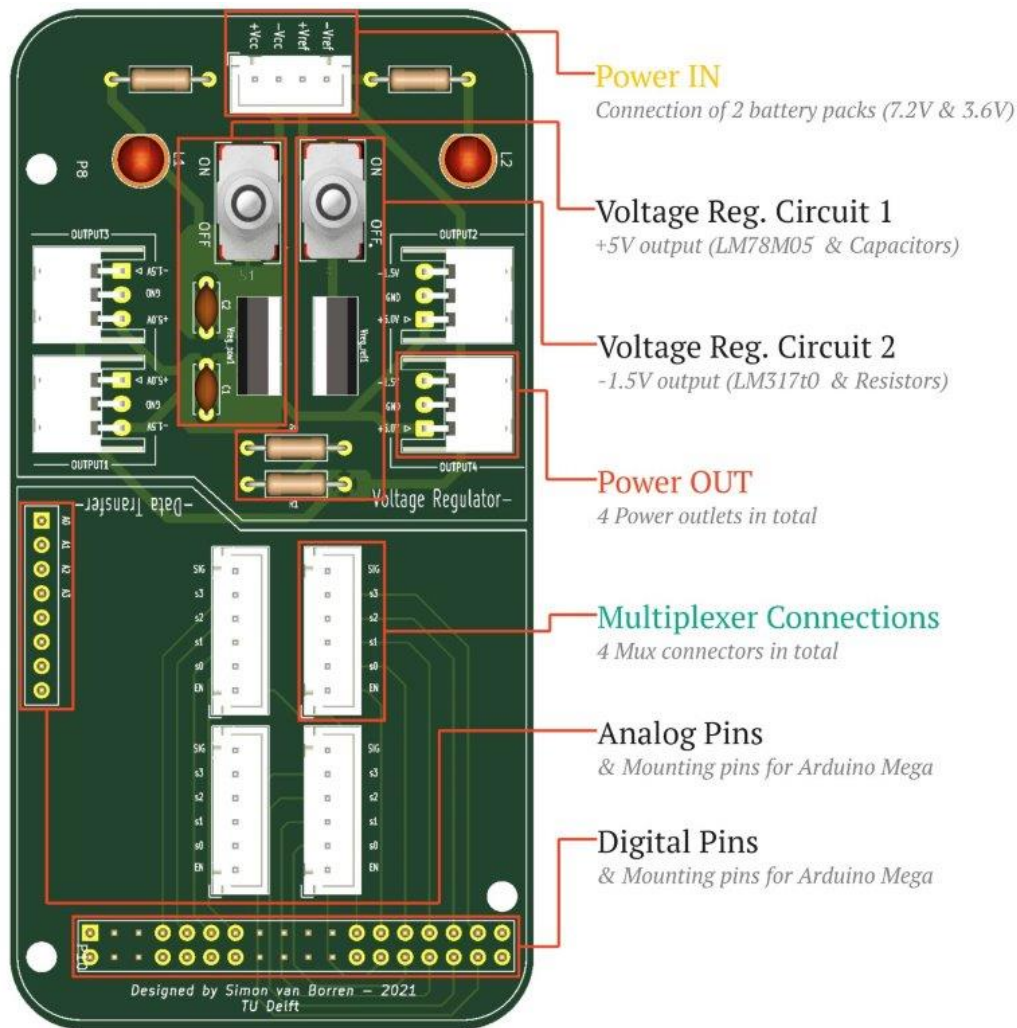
A model of the final design for the voltage regulator & data-transfer module printed circuit board (PCB). The module is separated into two parts where the upper part serves as a voltage regulator and the lower part as the data-transfer hub. The module is mounted directly on top of the Arduino and is connected to a dual power supply. A signal conditioning module is connected with the multiplexer (MUX) connection and with the power output. The dimensions of the board mounted on the microcontroller (up to the top of the toggle switch) are $107 \times 55 \times 39\text{mm}$.
